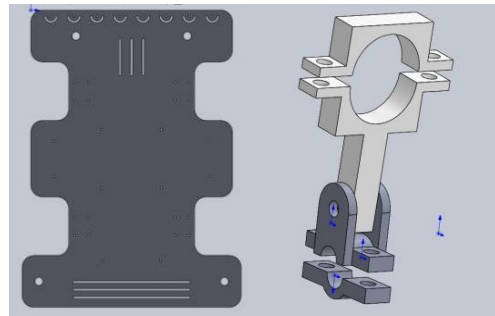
(a) The chassis and (b) the ultrasonic clamp
